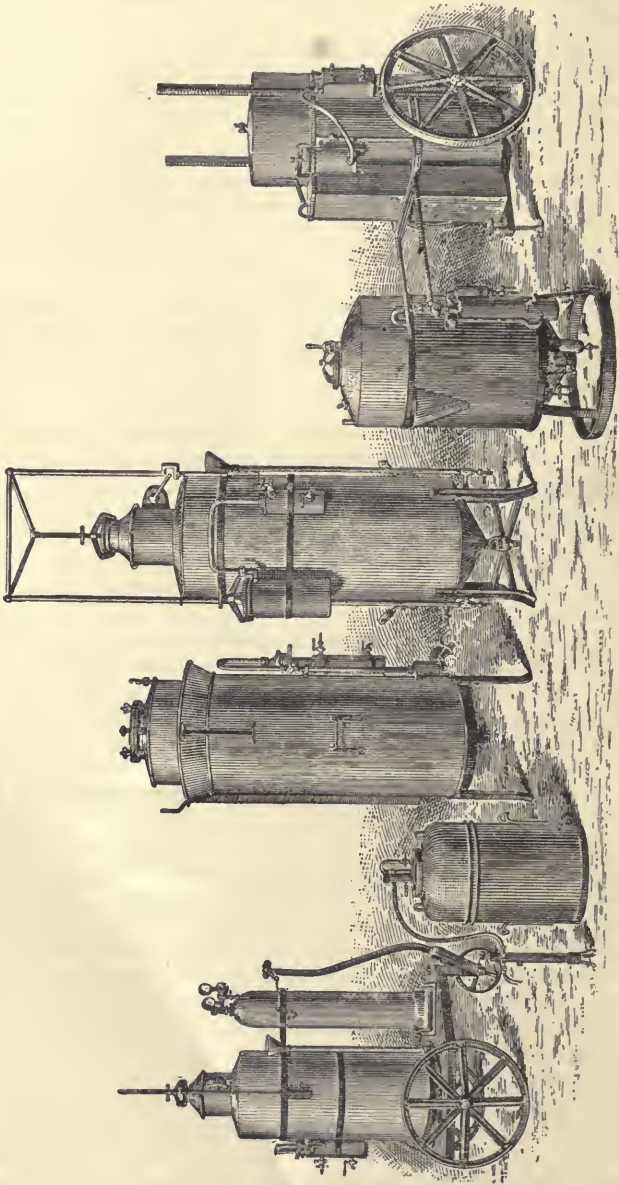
Common types of portable generators for autogenous welding.
